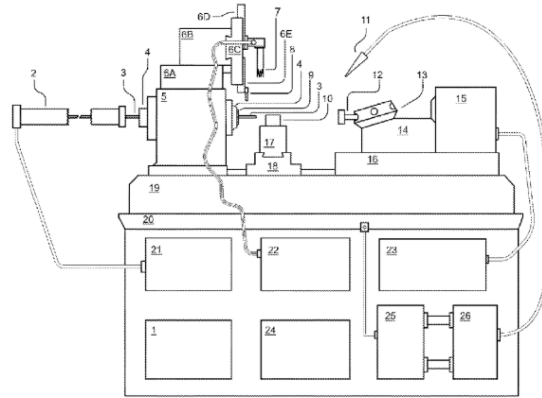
Single Machine Capable of Performing Dissimilar Manufacturing Operations
